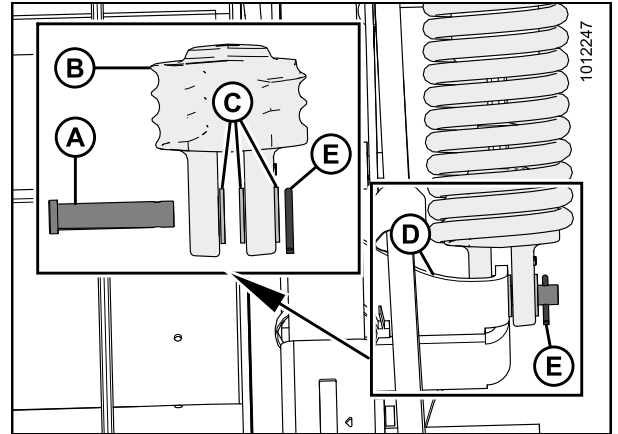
Left Side Spring Float Assembly Shown – Right Side Opposite
